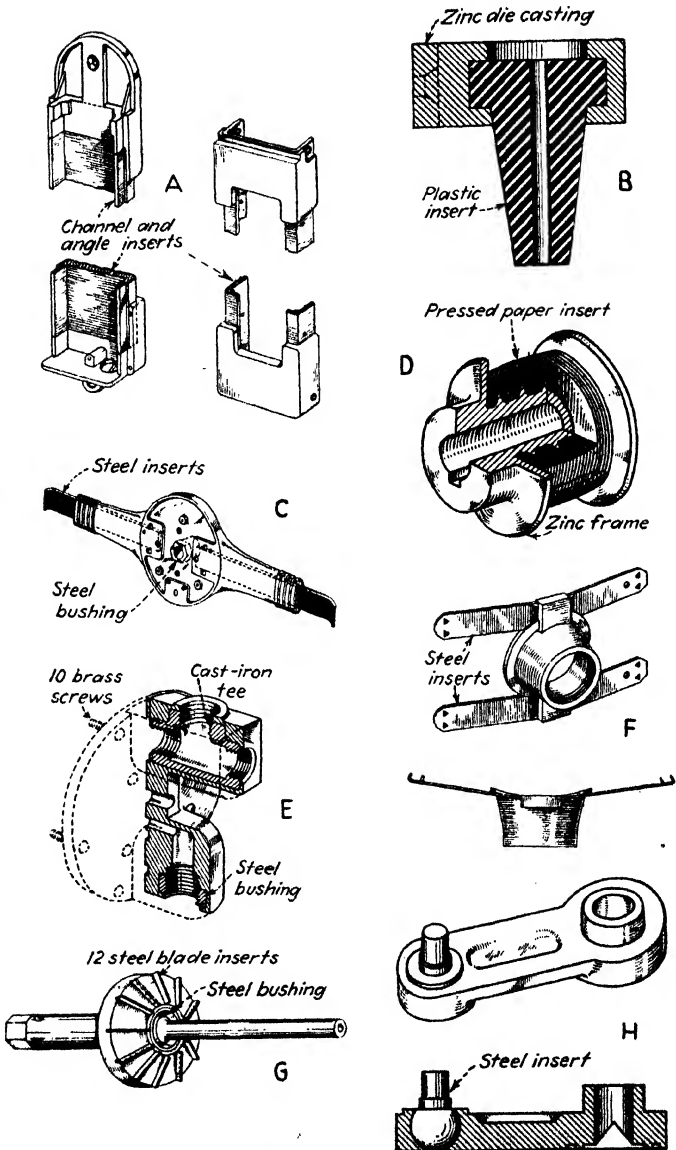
All these die castings have inserts cast in place for following reasons: (A) End fittings in zinc alloy are cast around aluminum extrusions 39 in. long (for thermometer case) to give desired shape and fastening means. Dies used are of moderate size, as extrusions extend from them. (B) Zinc alloy die cast around
